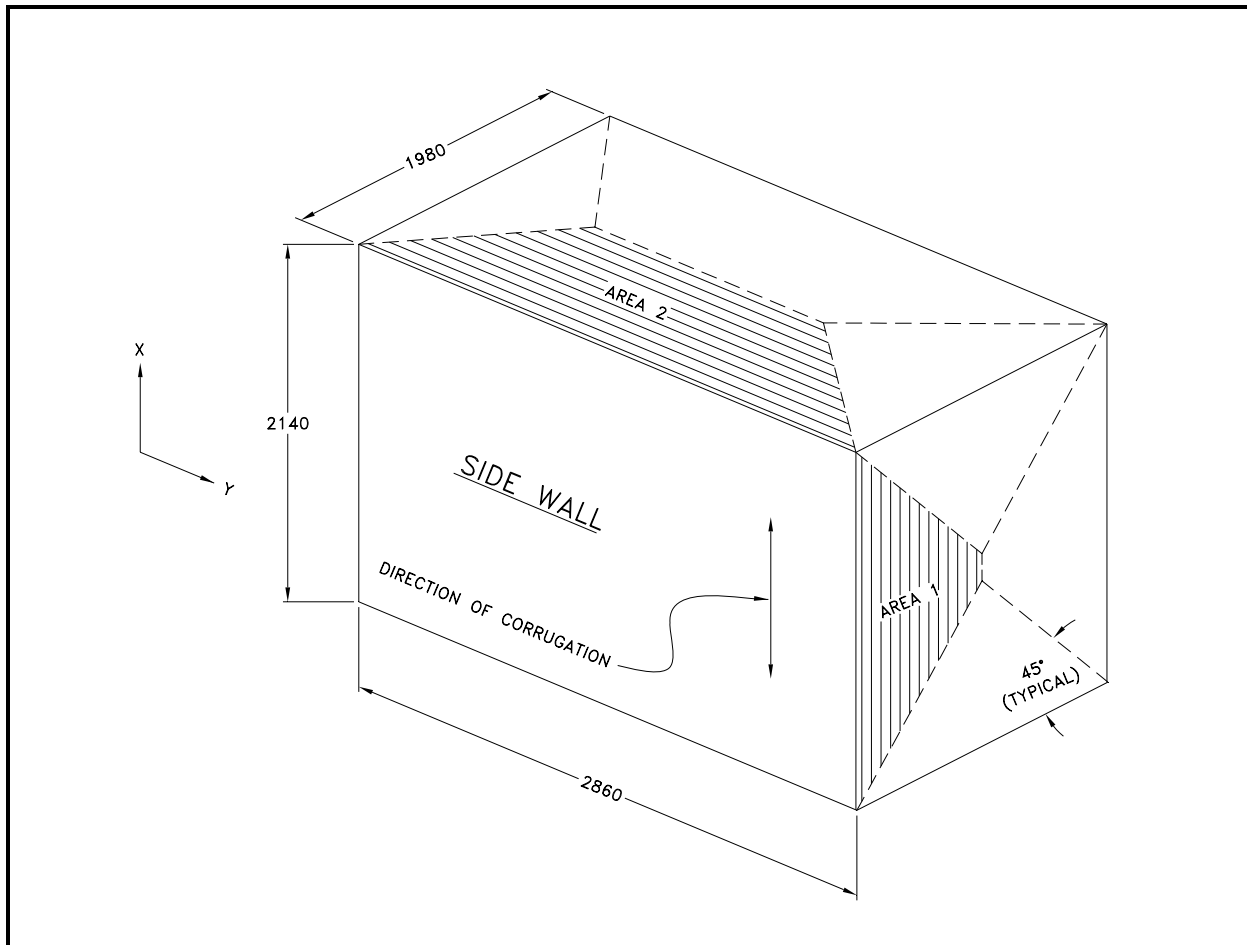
View of Sidewalls and Adjacent Panels Showing Areas Used to Calculate Edge Loads
